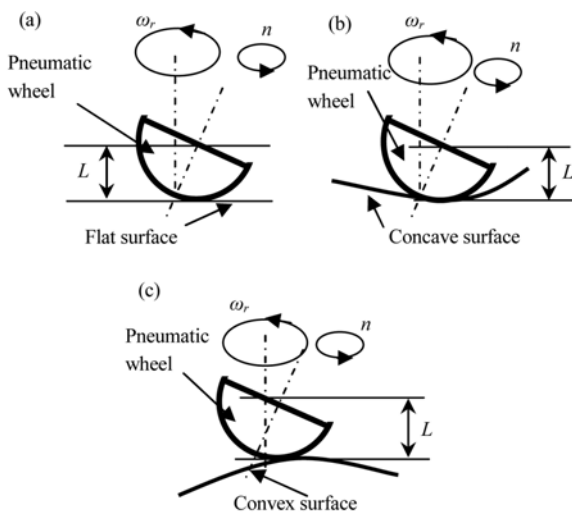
Schematic diagram of pneumatic wheel: (a) Machining with flat surface, (b) Machining with concave surface, (c) Machining with convex surface
